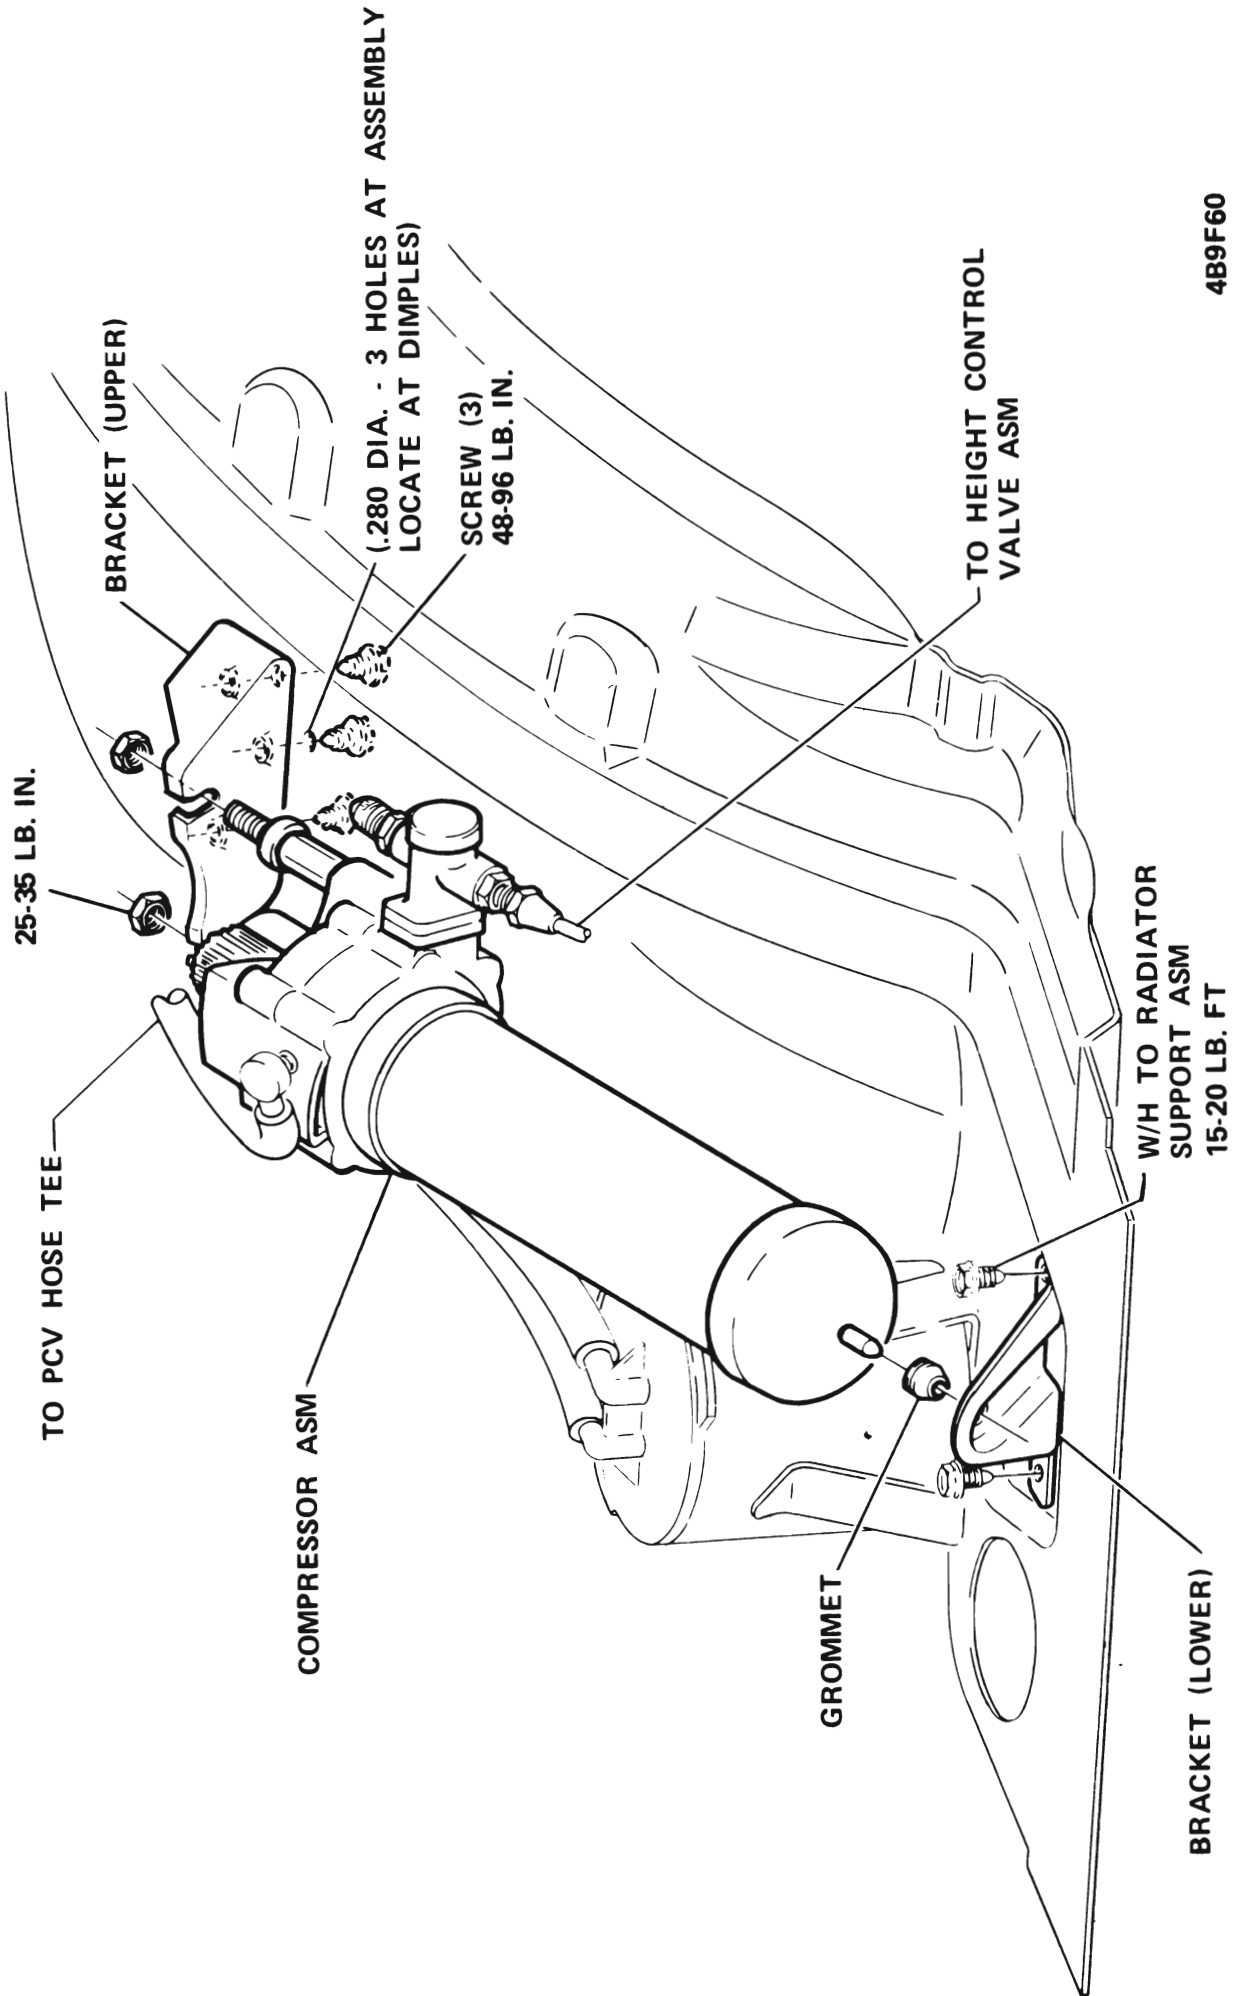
F-23 Automatic Level Control Compressor Mounting - "A" Series
